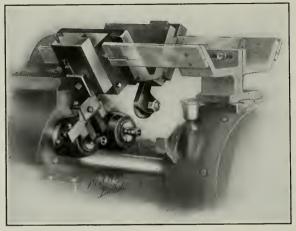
Shaving and Thread-Rolling Tools in Position
